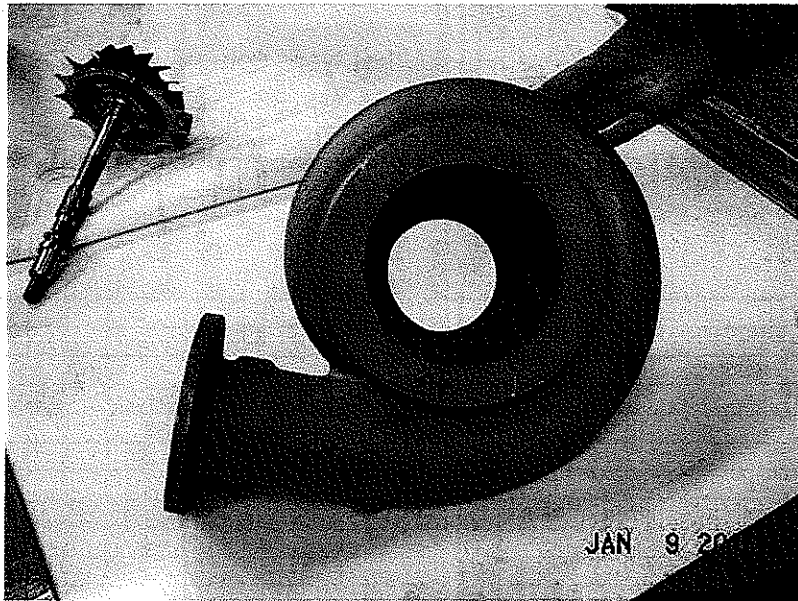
Power Turbine Housing Cast From Hastalloy-X
